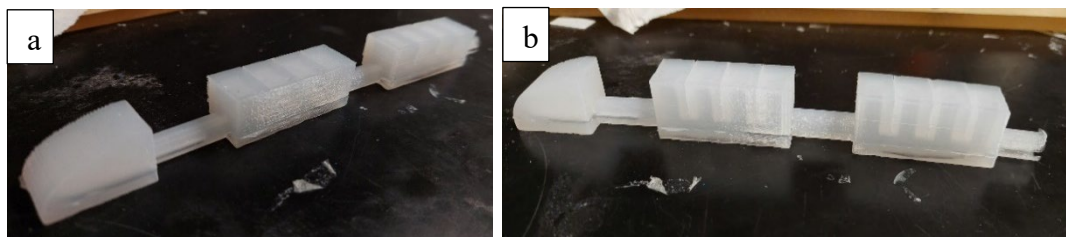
Silicone mold parting line failures (a) Connecting pressure channel (b) Bellow chamber
